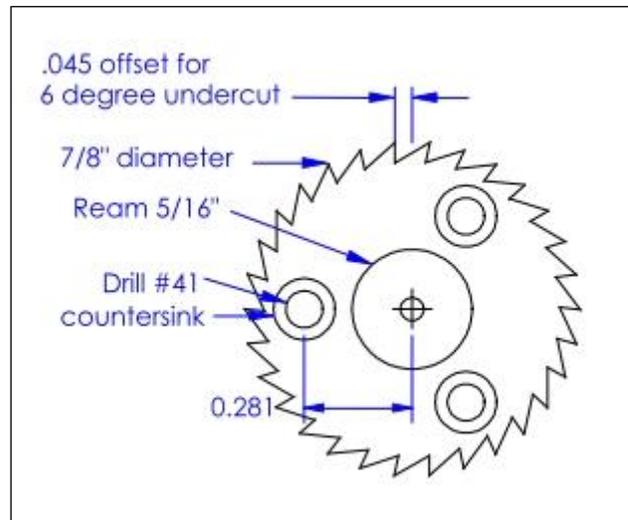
Construction drawing of the 30-tooth fusee ratchet.
